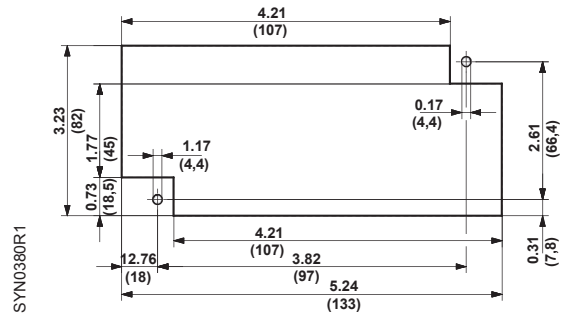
Panel Cutout if Controller is Wired After Mounting.
